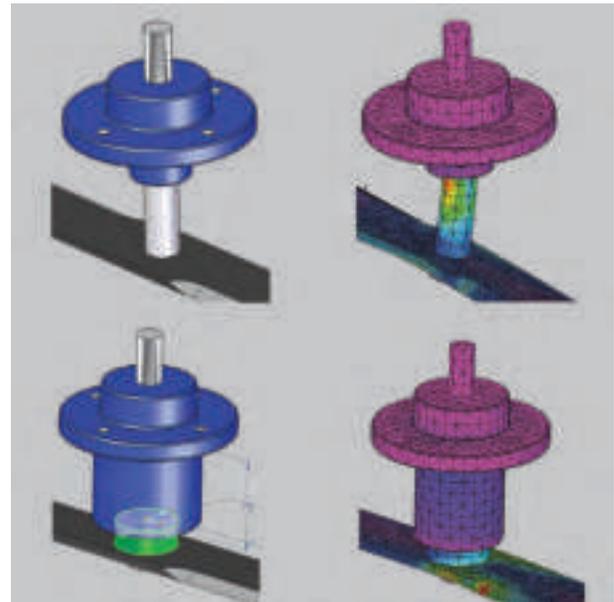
A Solid Edge assembly is analyzed and excessive deflections were found (upper right). A quick design modification using synchronous technology (lower left) solves the problem (lower right).
